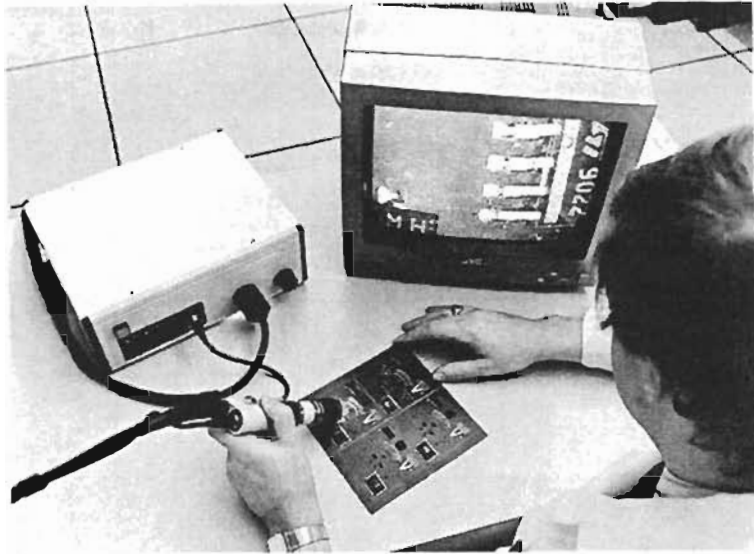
Visual inspection system incorporating a hand-held microscope (Leica UK)
